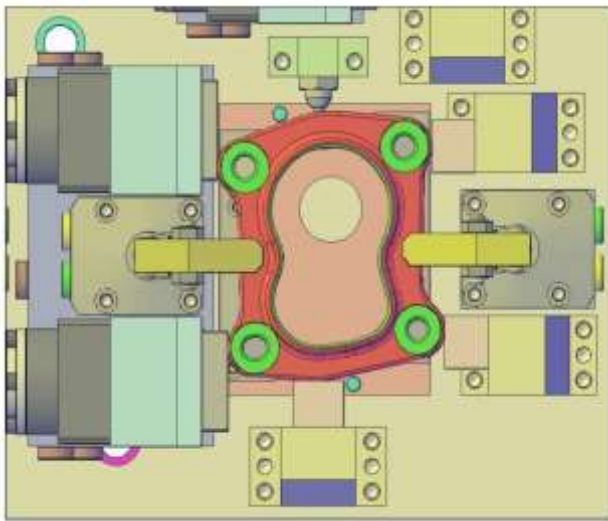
3D view of 16-cylinder fixture assembly for one component
